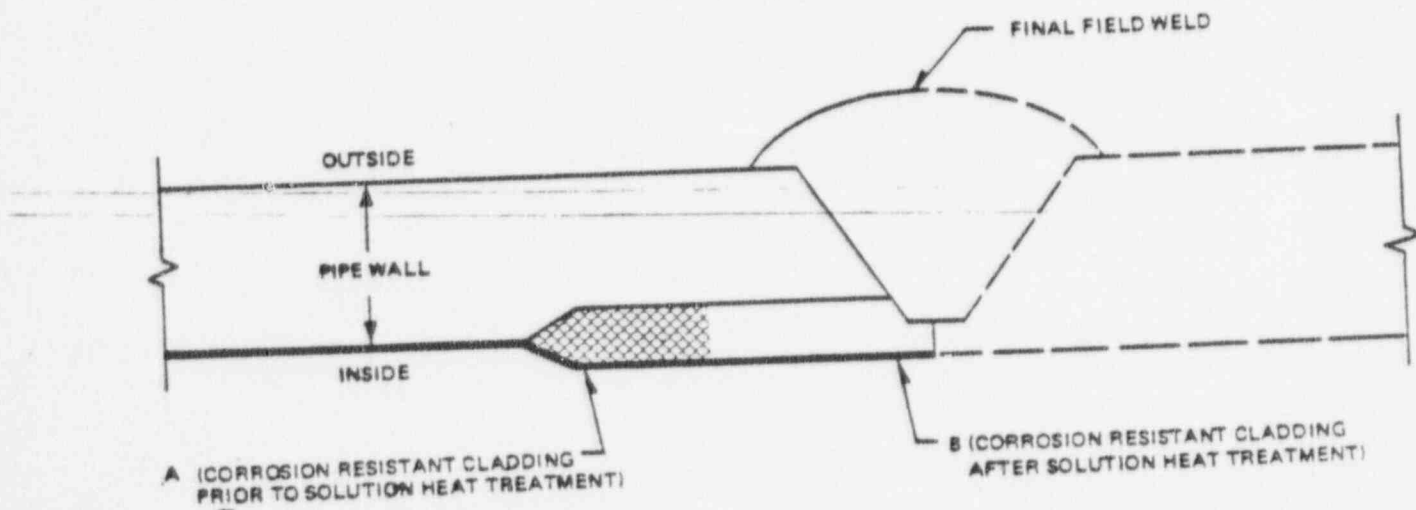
Corrosion Resistant Cladding Process for Type-304 Stainless Steel Welded Piping
